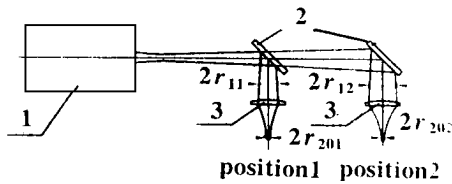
Parameter variety of the processing head of the fly laser cutting machine
